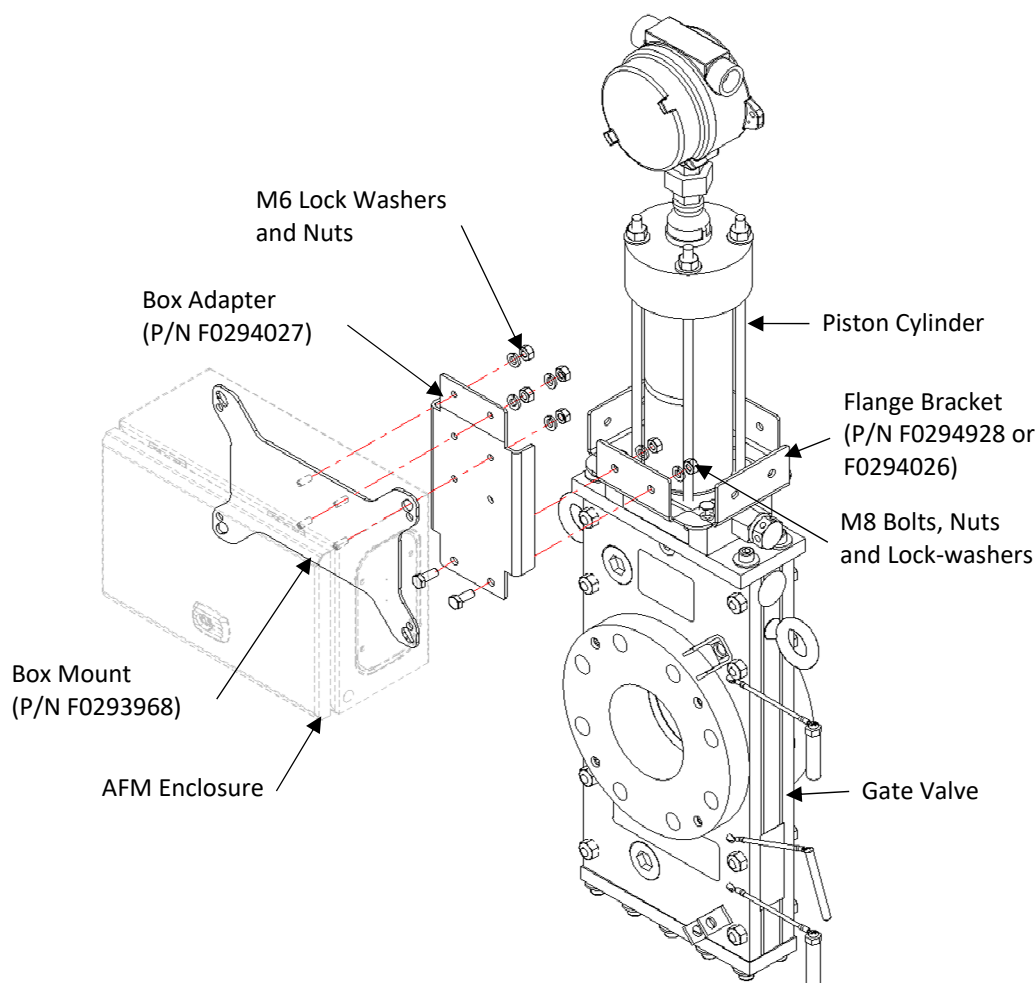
AFM Attachment to New EIVs Equipped with Flange Bracket
